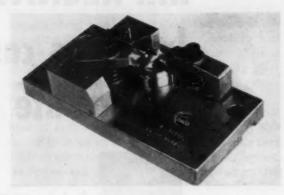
Dual purpose fixture shown here is used for milling slat in one ear. In second operation fixture uses angle cutter to mill chamfer on top inner edge of the slotted ear.
